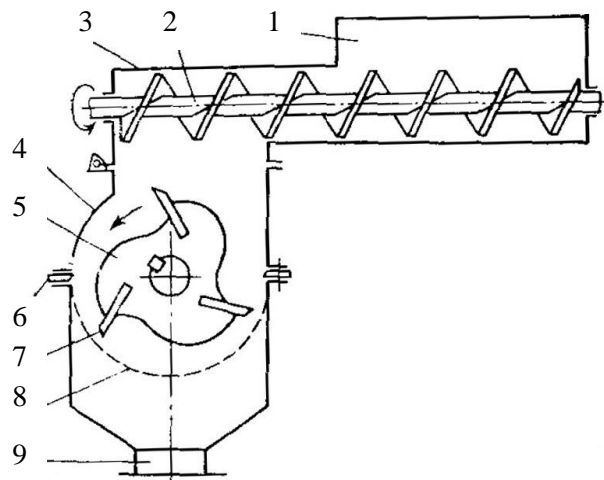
Scheme of a knife rotary shredder with a screw feeder [13]:
